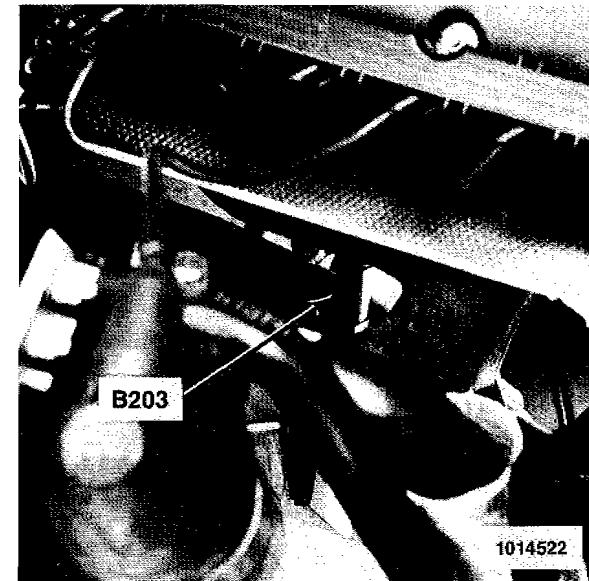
Lower RH Rear Of Engine (M20 Engine Shown; M30 Engine Similar)
